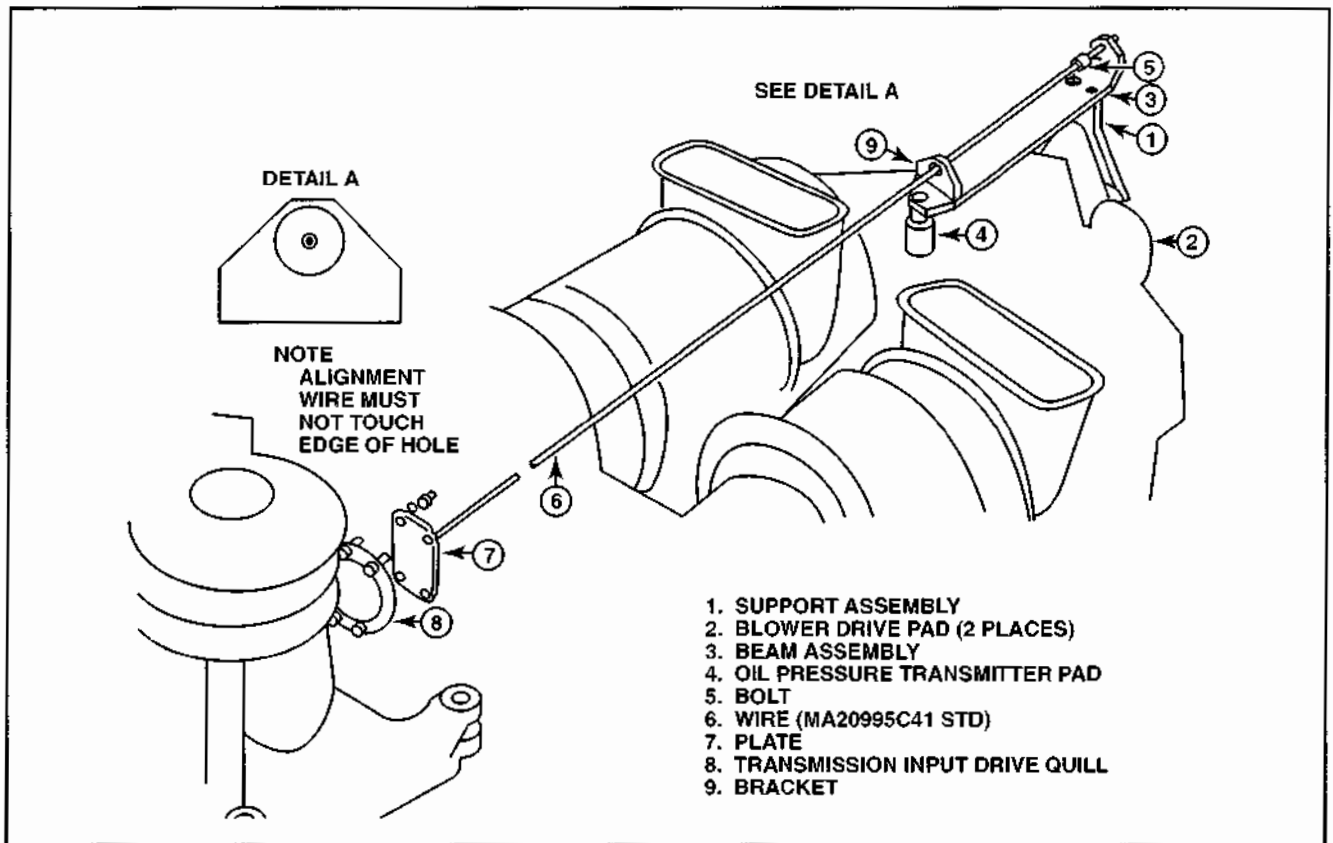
To check engine-to-transmission alignment, a beam assembly is typically mounted to an engine drive pad. A piece of safety wire is then strung from the beam assembly to a plate on the transmission. The wire passes through a target hole in a bracket attached to the beam assembly. When the wire is taut, it should pass through the target hole without touching the side of the hole. If it touches, the mounts should be shimmed until the correct alignment is obtained.
